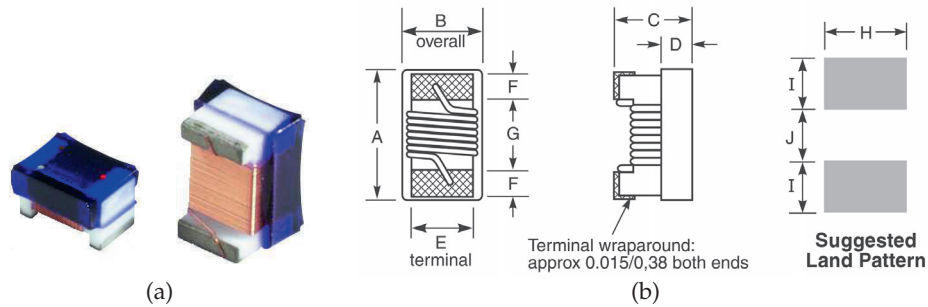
Chip inductor: (a) in an 0603 surface-mount package; and (b) schematic showing sizes and pads to be provided on a circuit board ($A=64$ mils (1.63 mm), $B=33$ mils (0.84 mm), $C=24$ mils (0.61 mm), $D=13$ mils (0.33 mm), $E=30$ mils (0.76 mm), $F=25$ mils (0.64 mm), $G=25$ mils (0.64 mm), and $H=40$ mils (1.02 mm)). Copyright Coilcraft, Inc., used with permission [2].
